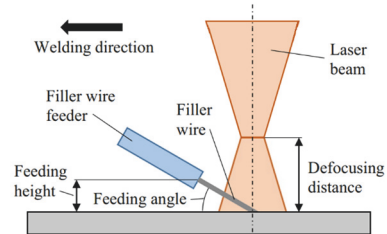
Schematic diagram of the new-generation laser filler wire weld plate technology [6]
